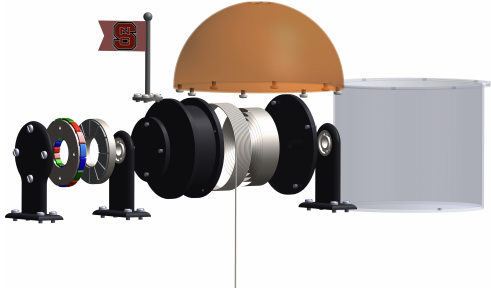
Exploded SolidWorks view of the full buoy assembly.
